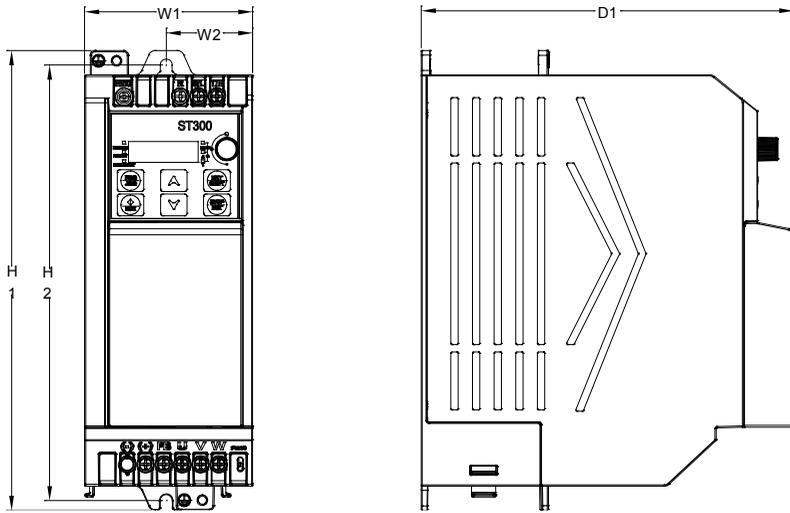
Dimensions and hole positions for VFDs in frames A and B
